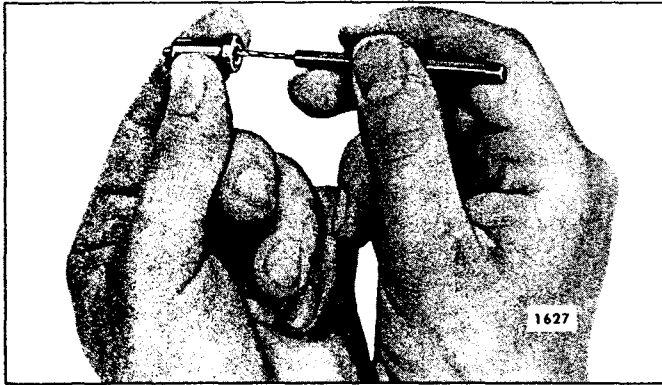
Cleaning Injector Spray Tip Using Tool J 1243
